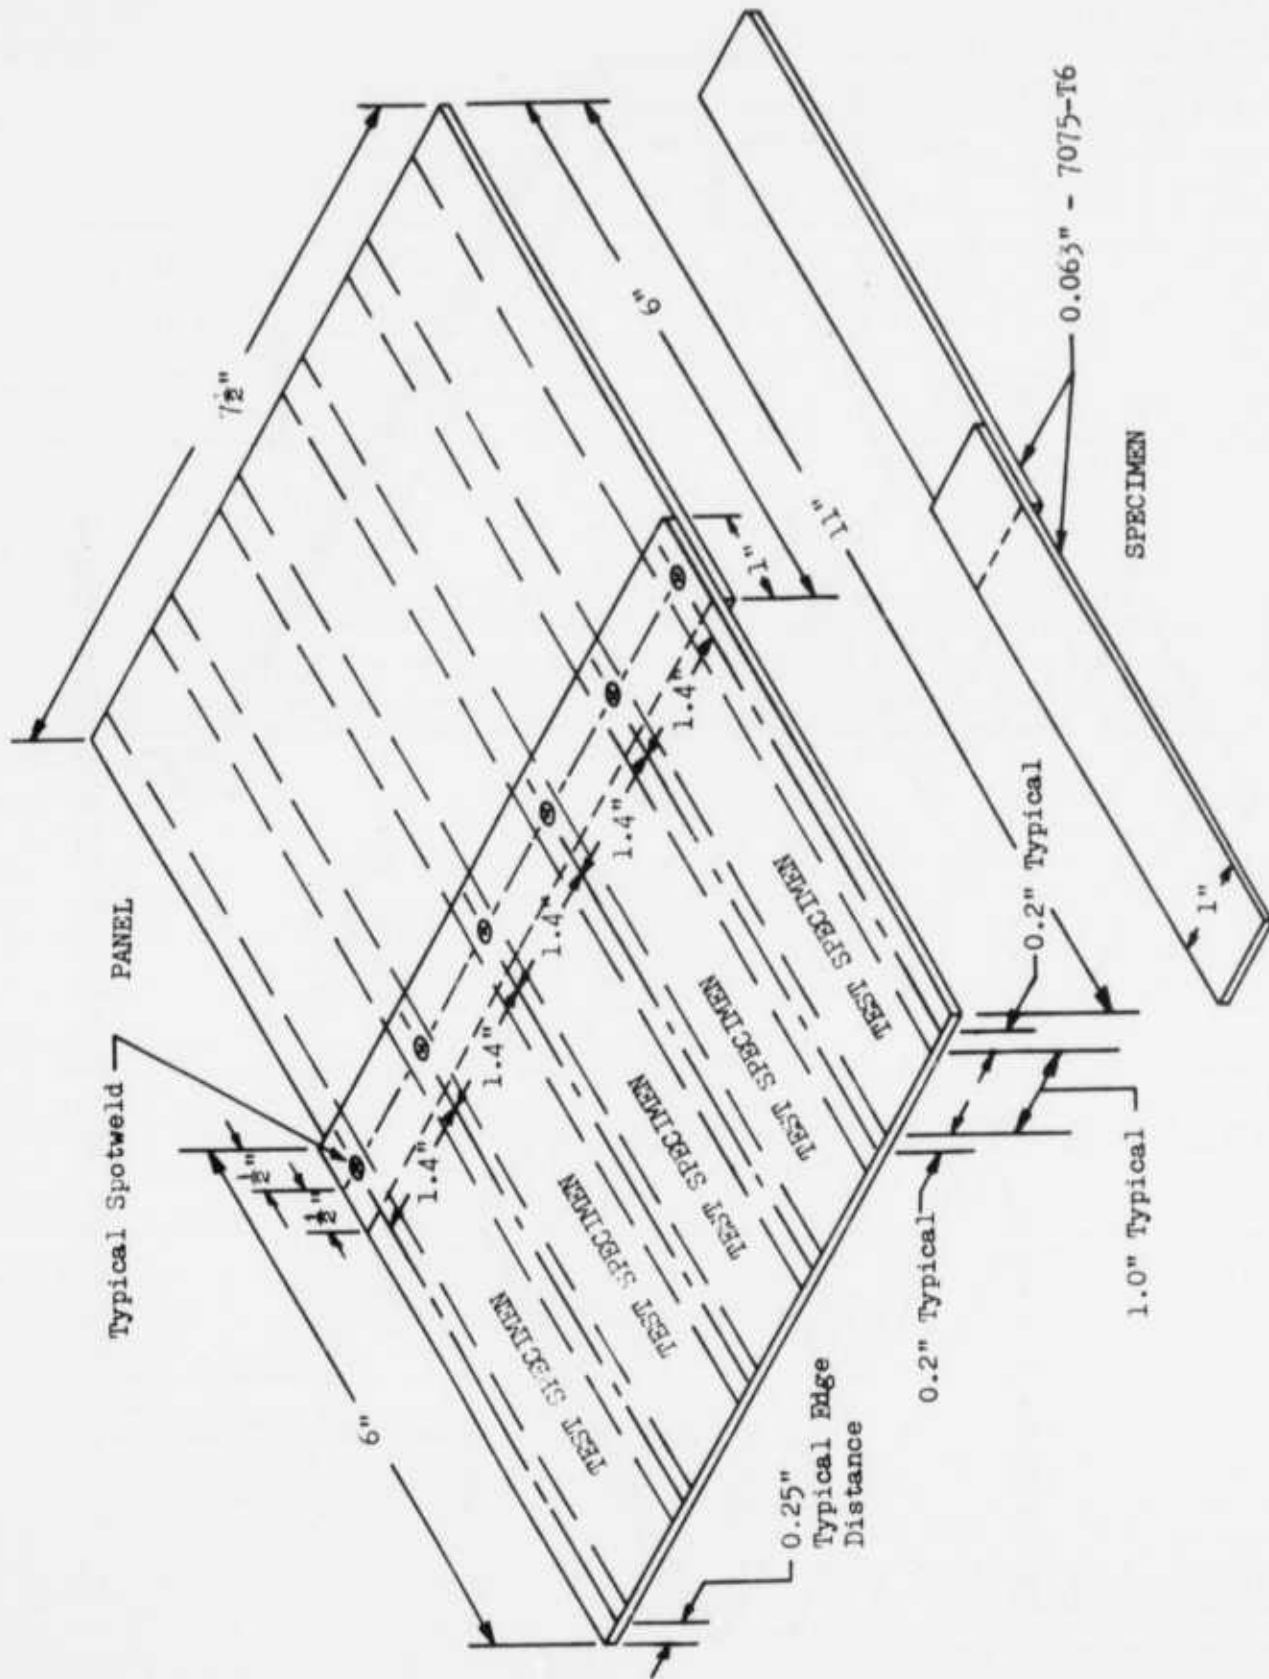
LAP SHEAR, WELDABILITY AND WELDBOND TEST PANEL AND SPECIMEN (L/t = 16)
